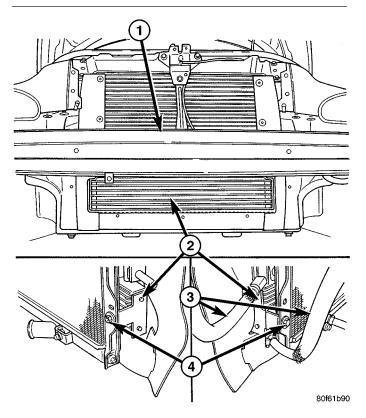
Automatic Transmission Oil Cooler - Removal/Installation
